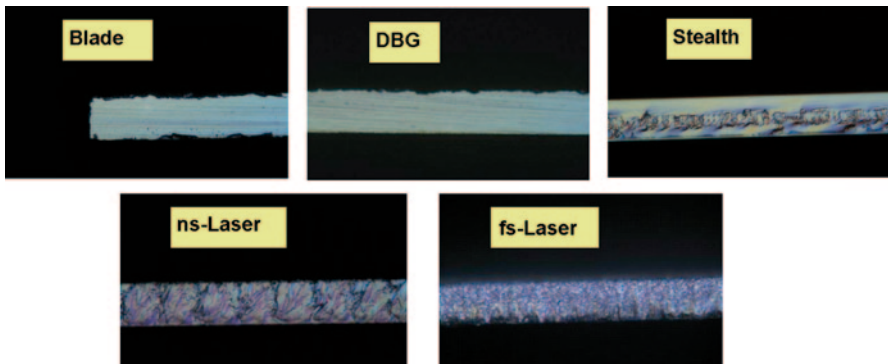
Die cross-sectional view at the dicing street. *DBG* dicing before grinding
